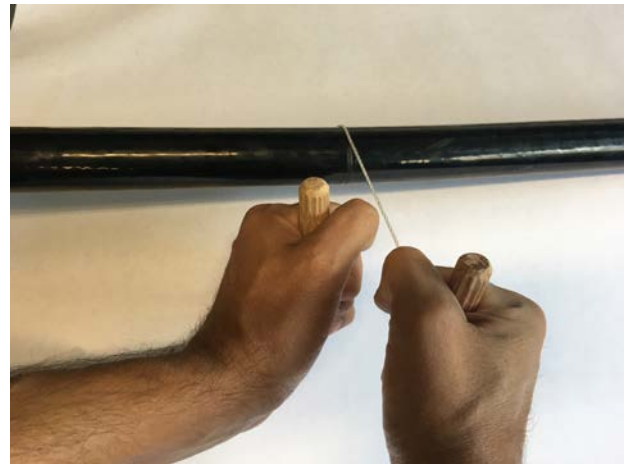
Use of the insulation cutting tool to cut the insulation without damaging the layers beneath
